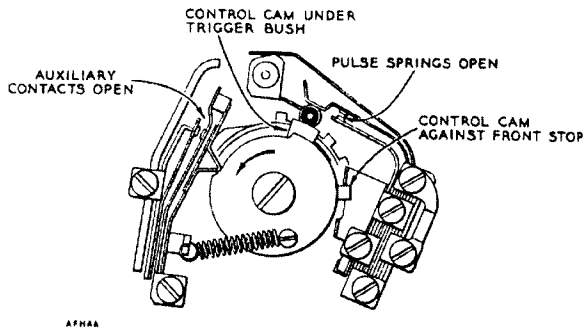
CONTROL CAM HOLDING PULSE SPRINGS OPEN
